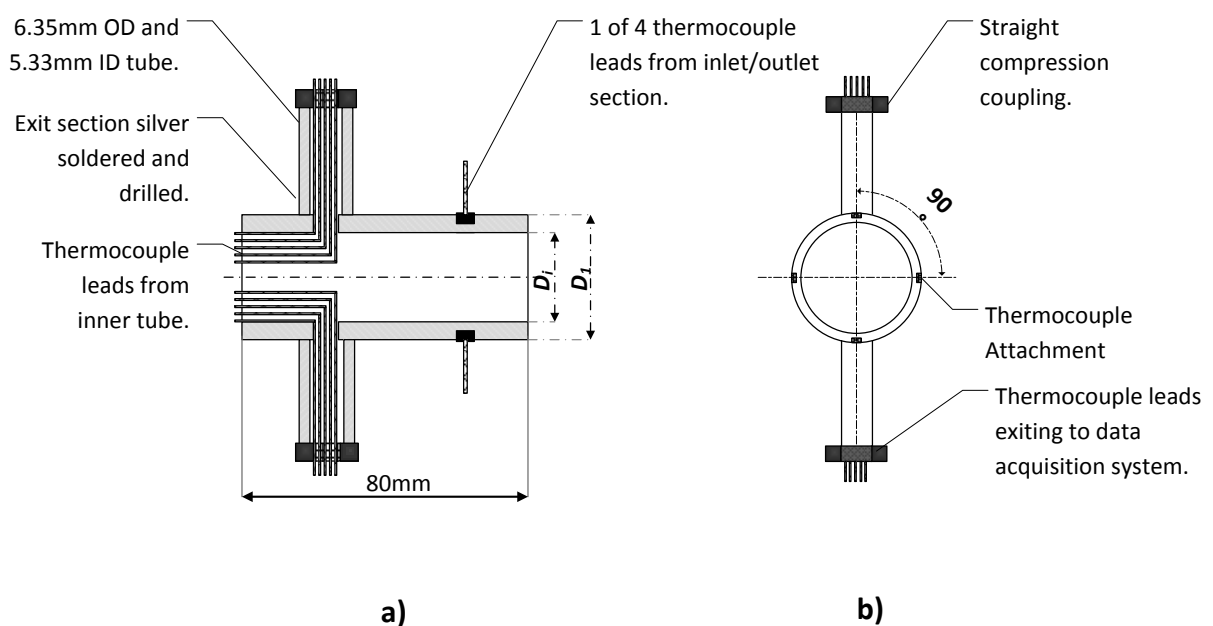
a) Inlet and Outlet sections for the inner tube. b) Circumferential locations of thermocouples attached to the inner tube inlet and outlet sections.
